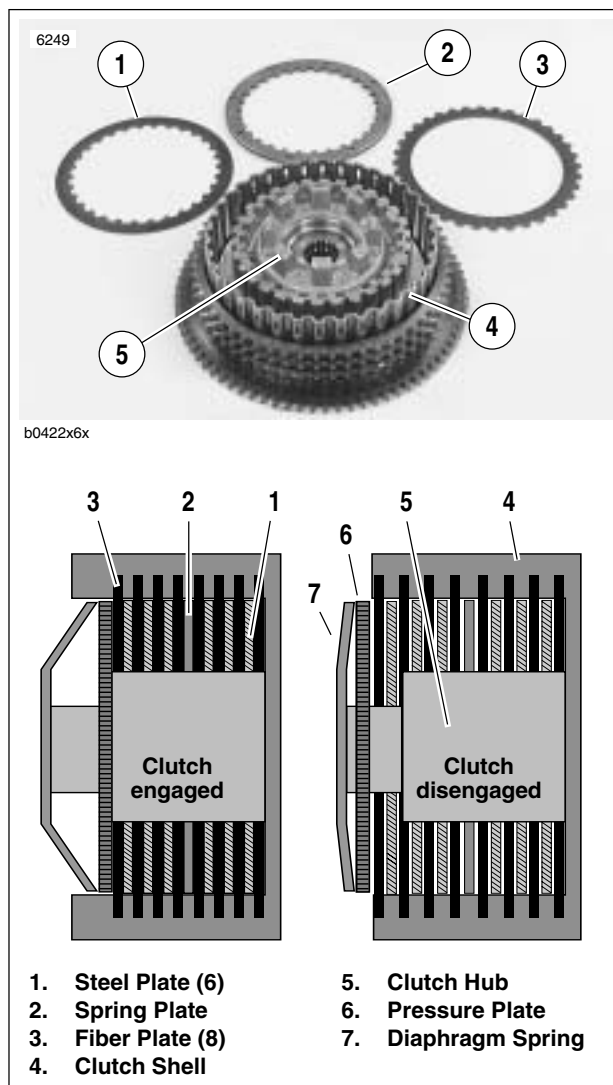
Clutch Plates and Hub/Shell Assembly
